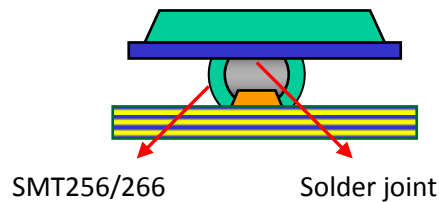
Schematic Cure SMT 256 or SMT266 Encapsulated Solder Joint
